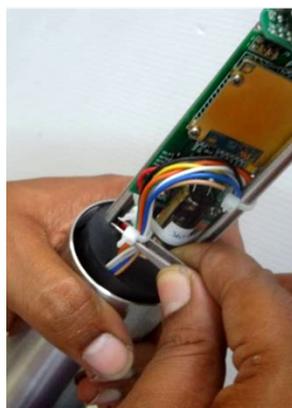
Pulling of wire bunch while pushing back GSM assembly
